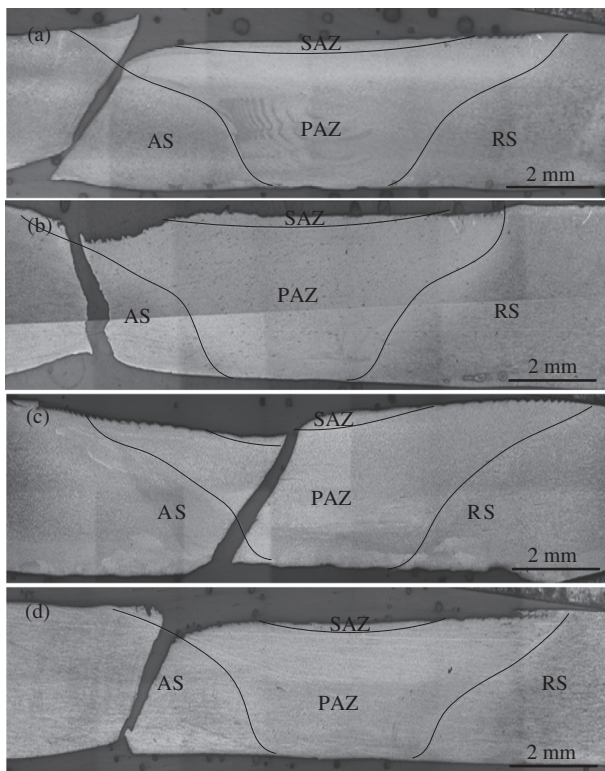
Fracture location of LCFSW welds at the rotational velocity of 1800 rpm with different welding speed: (a) 200 mm/min, (b) 400 mm/min, (c) 600 mm/min and (d) 800 mm/min.
